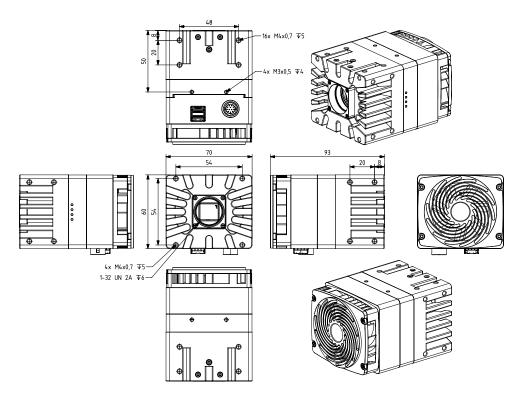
dimensional drawing MX161I203I245xG-SY-X4G3-xxx-SFF-AIRCOOLED
